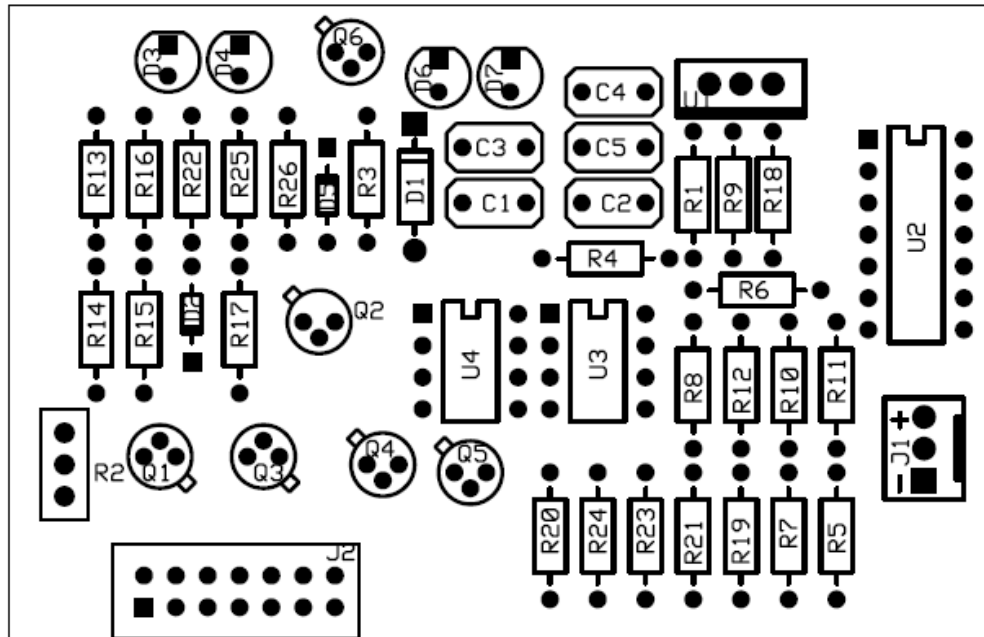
Silkscreen view of the circuit board showing pads and part labels
